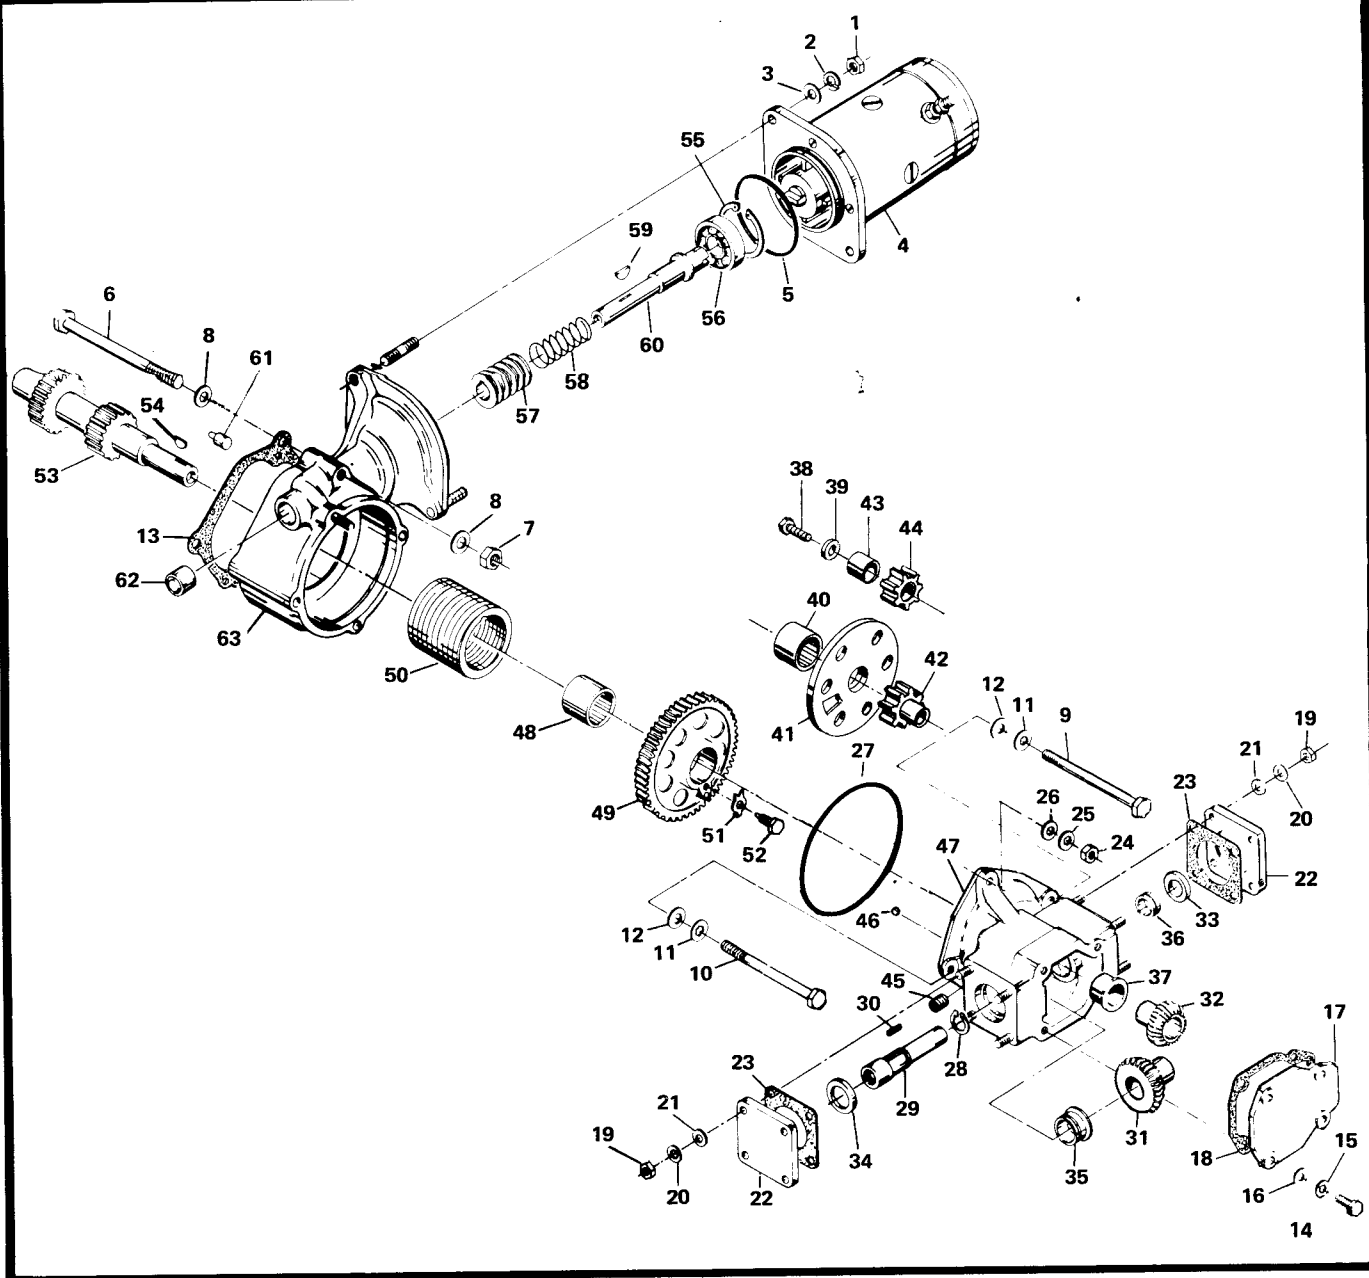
Starter Adapter for IO-360C and G & TSIO-360A.
